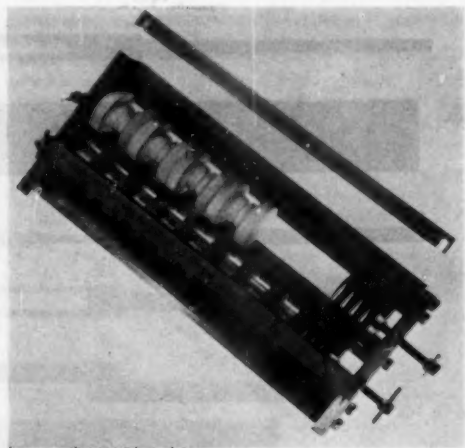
CLAMPING FRAME FOR PREPARATION OF TENSILE SPECIMENS
